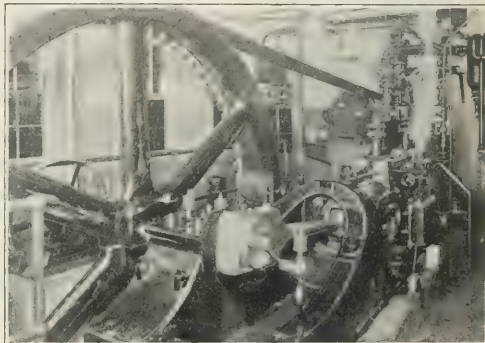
HORIZONTAL 30-TON COMPRESSOR DRIVEN BY THREE-PHASE MOTOR
